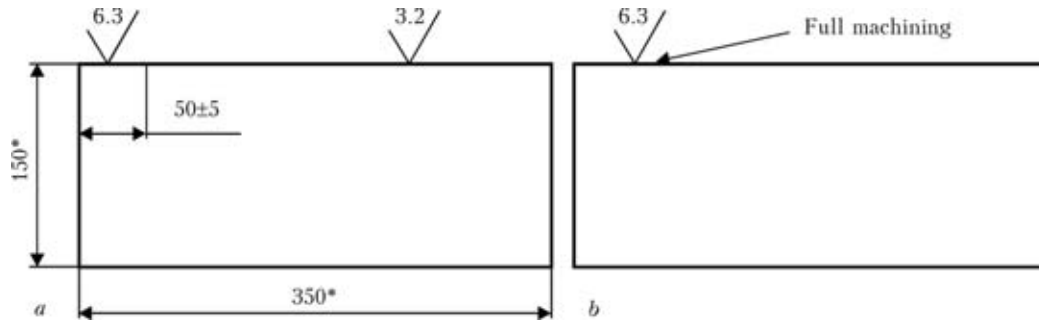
Welding set-up: (a) butt-joint with varied edge surface roughness; (b) butt-joint with constant edge surface roughness
